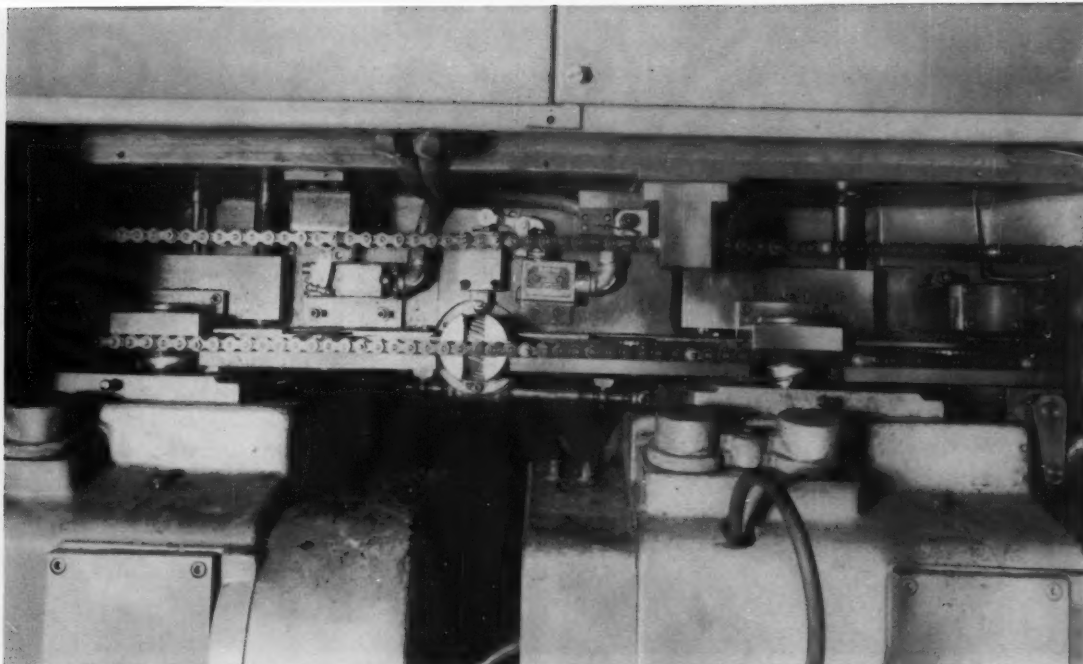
Automatic, two-station deburring and chamfering machine. Work-pieces are rotated 180 degrees, as seen in center, between first and second stations.
